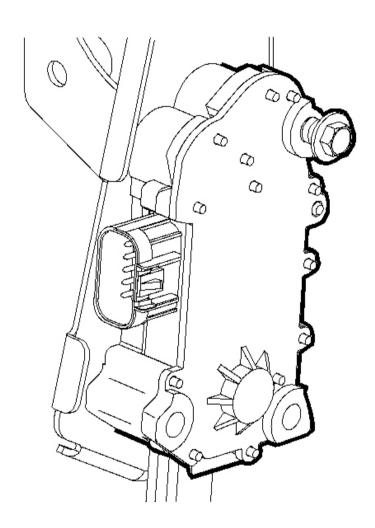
View Of APP Assembly From The Vehicle Courtesy of GENERAL MOTORS CORP.
